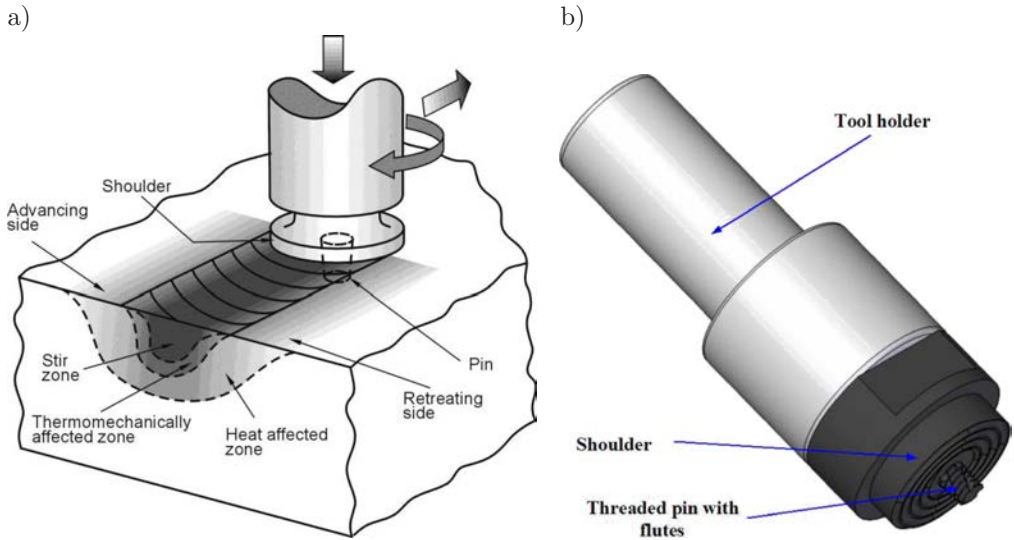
Schematic drawing of Friction Modified Processing technique a) and tool b).
